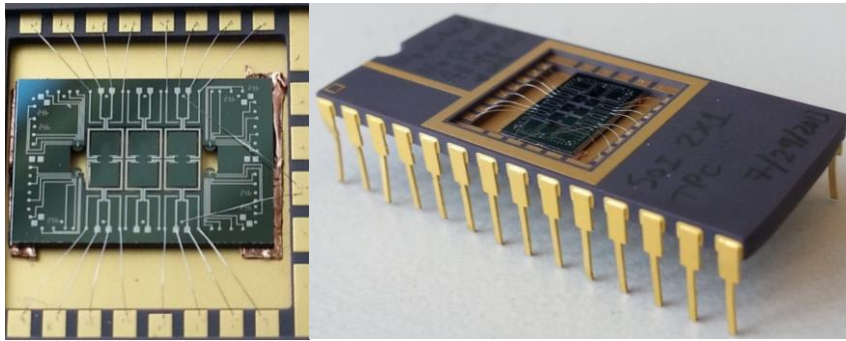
Photographs of a 2 mm x 1 mm μ TPC die mounted in ceramic DIL package.
